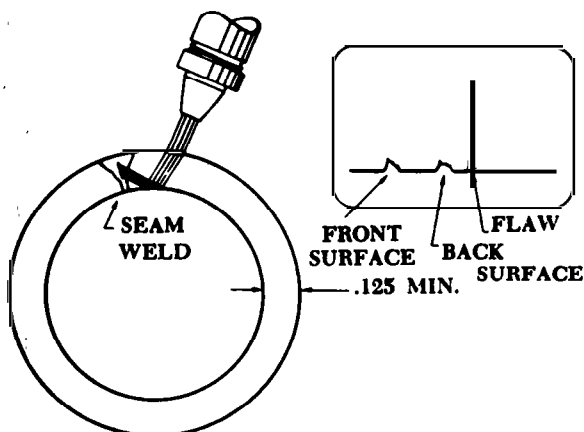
Angle Beam Penetrating a Weld Bead
